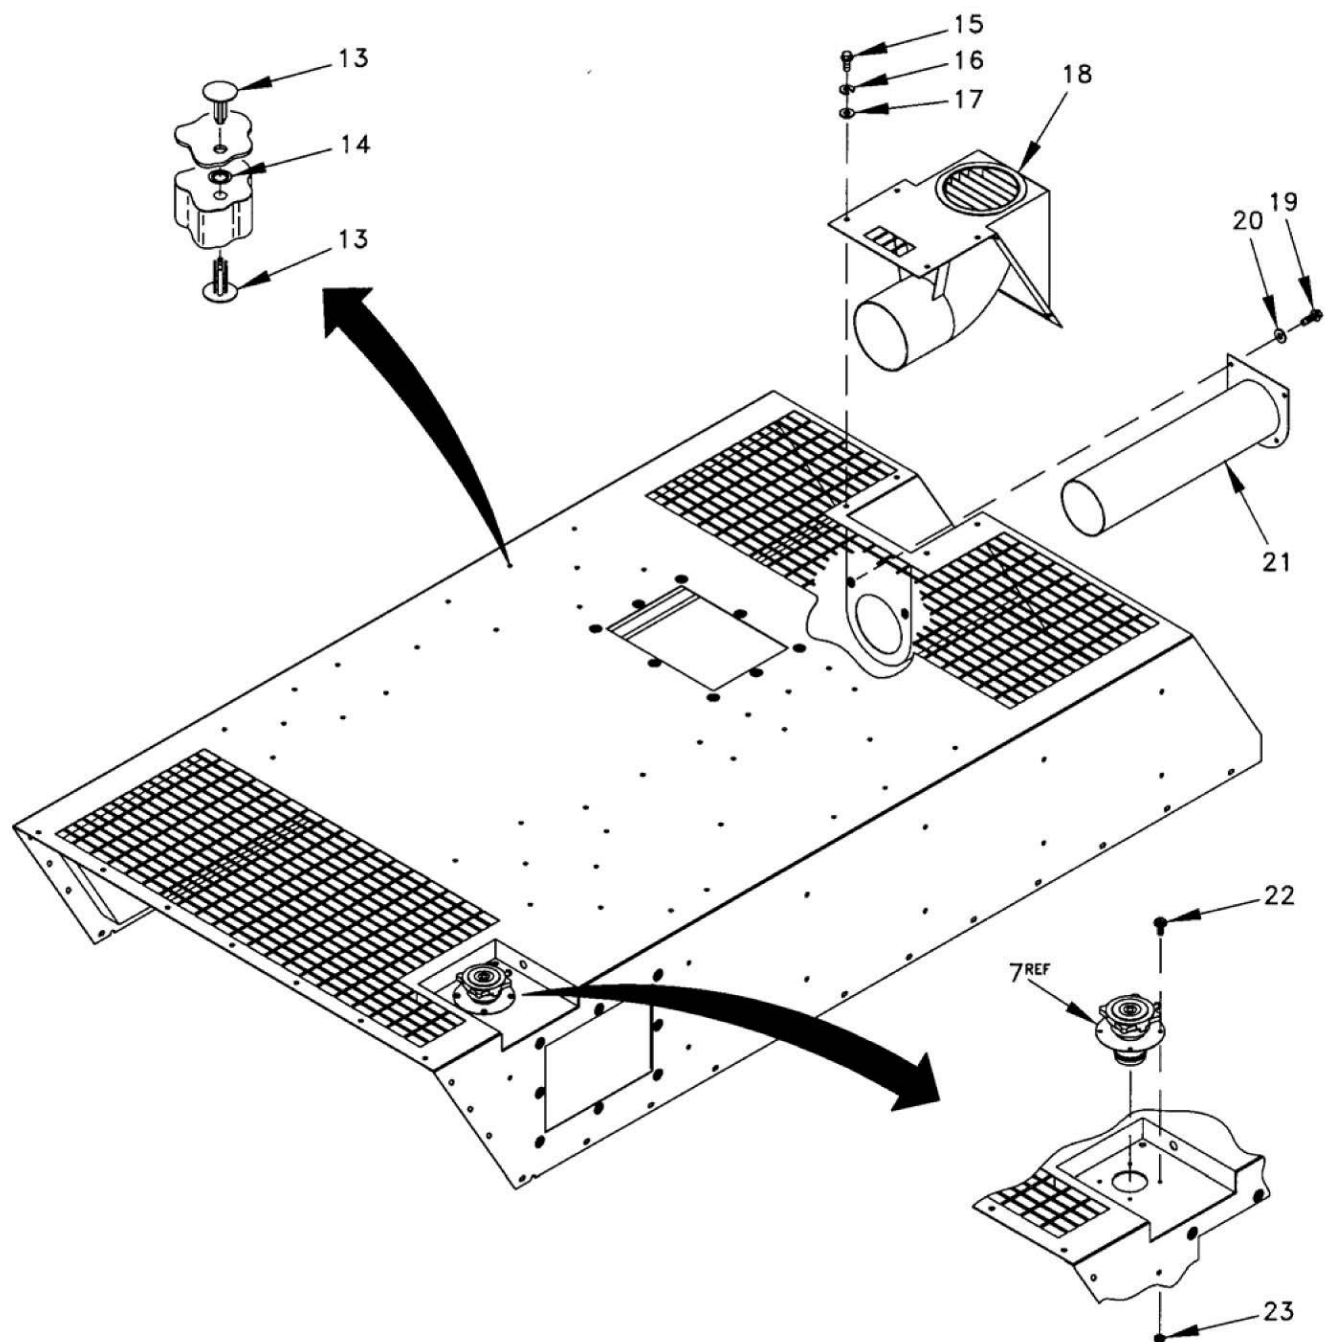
Front Roof Section Housing Assembly (Sheet 2 of 2).
